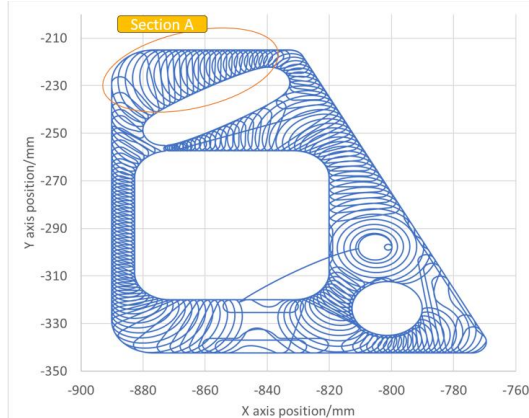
illustrates the machined geometry and tested adaptive tool path at the feed drive systems. The dynamic tool path has 0.25 mm lifts in the tool axis when the tool returns to the machining position, which induces more cooling and less tool wear, as depicted in Figure 2. The return feed rate is 8000 mm/min, the cutting feed rate is 4500 mm, and the cutting depths are $A_e = 1.5$ and $A_p = 5$ mm for the dynamic motion. The solid carbide flat-end mill tool has four flutes and a diameter of 12 mm. Limited information from commercial controllers is listed for control parameters in Table 1; it is not permissible to change or disclose the detailed controller parameter sets of the commercial system. As the tested LMFD system has a higher maximum acceleration and jerk setting than the BSFD system, the LMFD system may have a disadvantage regarding tracking error, which tends to increase at high acceleration and jerk for the comparisons.
